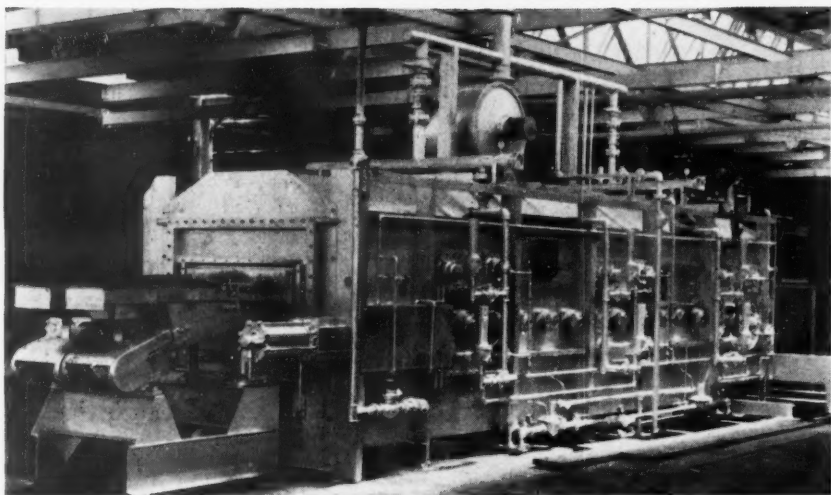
View of radiant tube belt furnace for carbon restoration installed in plant of large cap screw and bolt manufacturer
